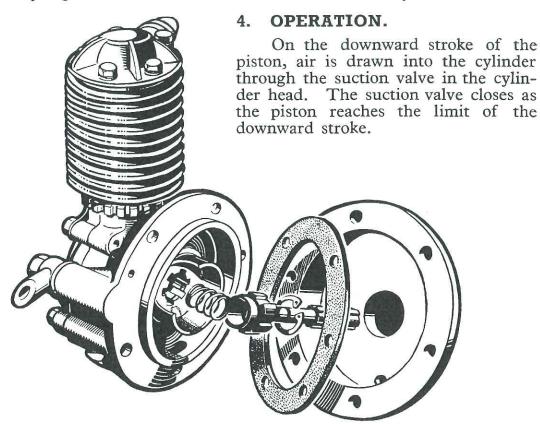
Installation. Drift shaft is spring loaded and held in position by a circlip. Gasket between compressor flange and drive flange.
